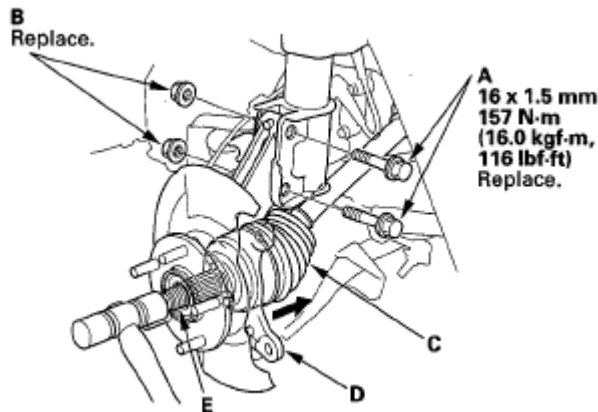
Identifying Pinch Bolts And Nuts With Torque Specification
